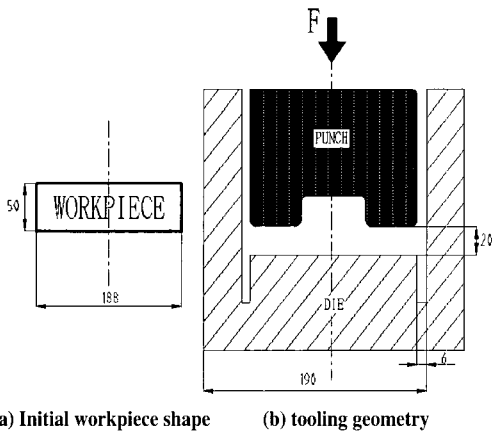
Initial workpiece shape and tooling geometry used in the pre-analysis of 6061 aluminum alloy wheel forging processes
